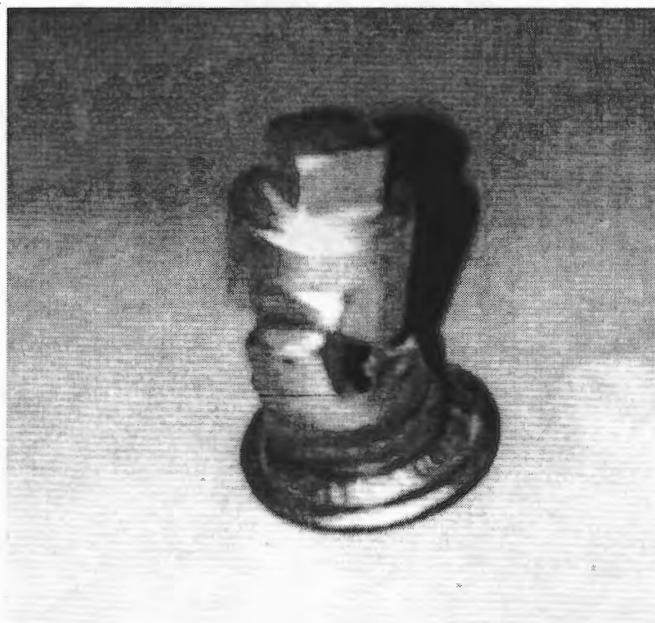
Swivel Joint Tool Was Welded to the Steel Dummy Fuel
